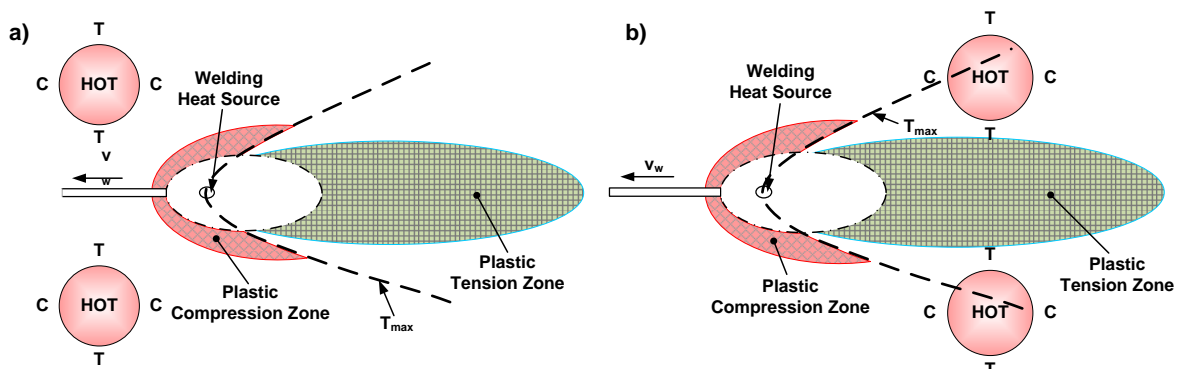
Positioning of hot spots in the plastic tension and compression zones of welding to implement TTH
